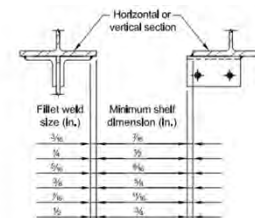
Recommended minimum shelf dimensions for SMAW fillet welds.
